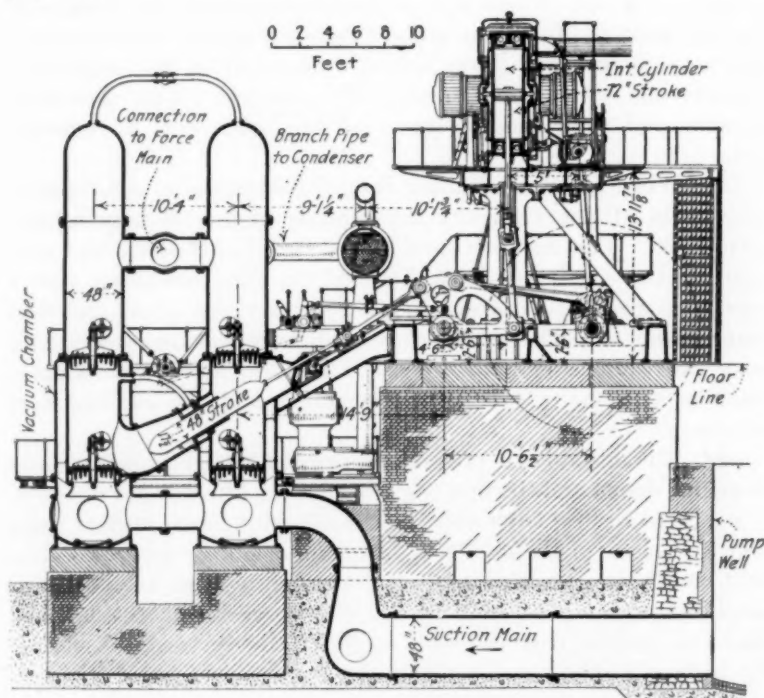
RIEDLER PUMPING ENGINE, BOSTON WATER WORKS
